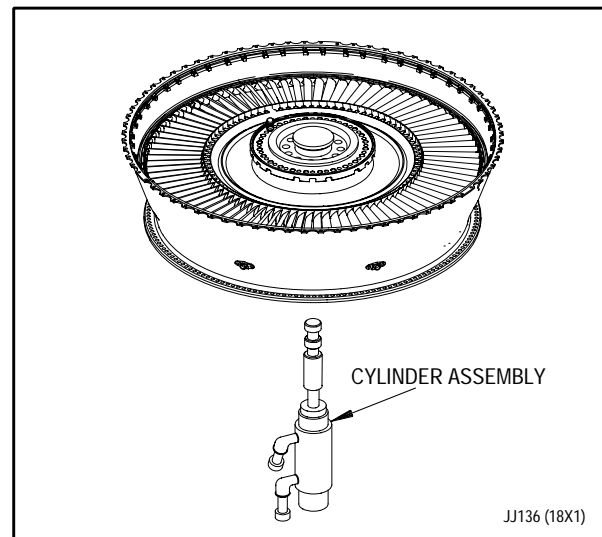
Fourth Stage Turbine Disk, Blades and Air Seal - Installation (Sheet 3 of 7)
